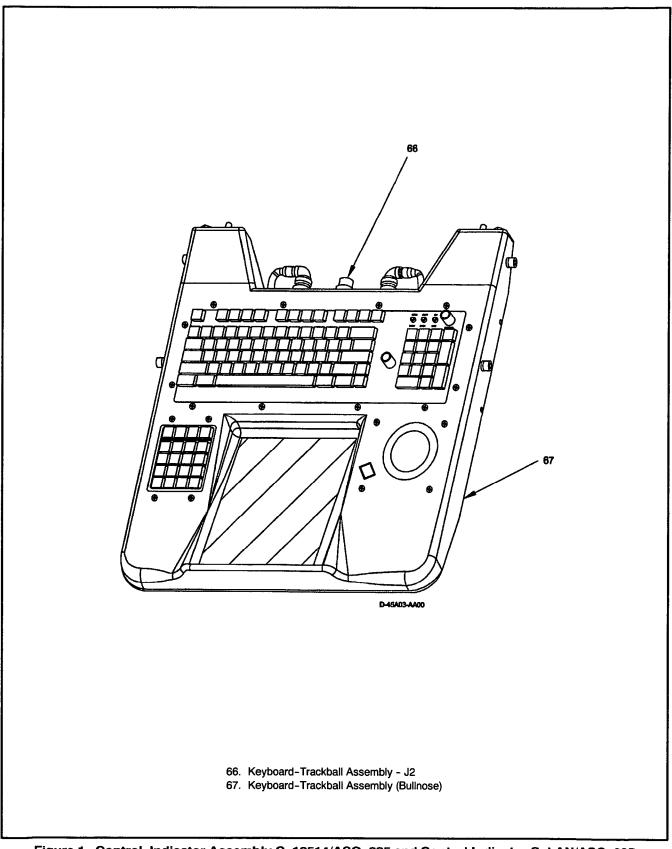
Control-Indicator Assembly C-12514/ASQ-225 and Control Indicator Set AN/ASQ-225 Components (Sheet 10)
